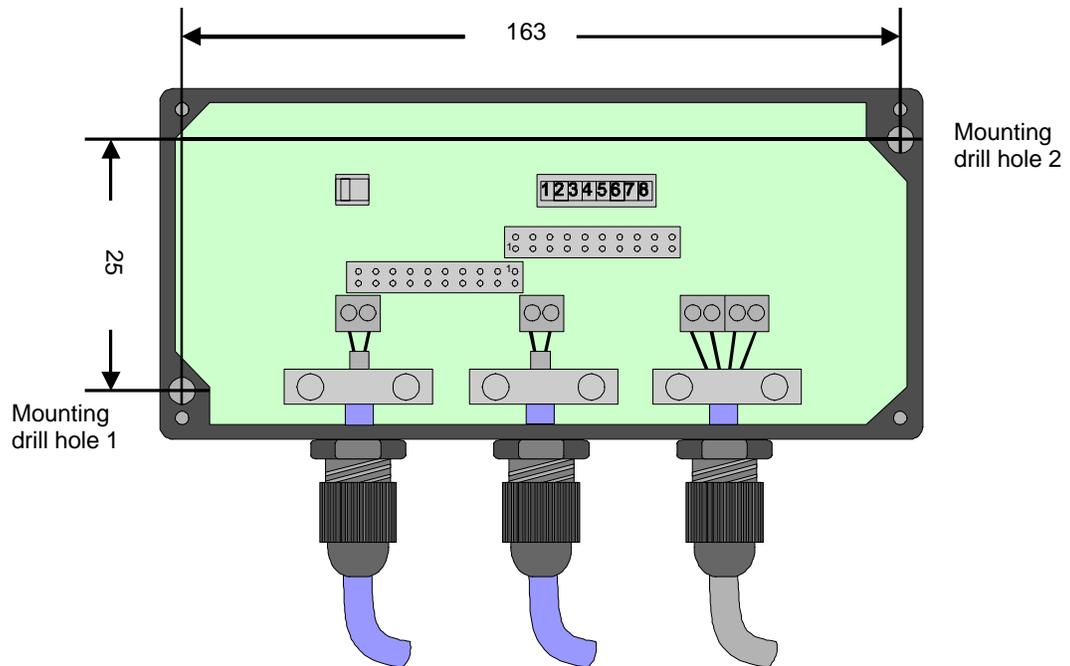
Drilling Dimensions for Securing the PROFIBUS ILM to a Mounting Plate
